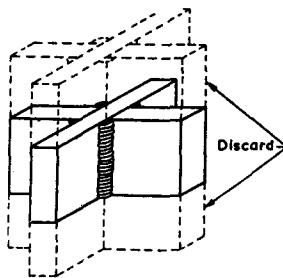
METHOD OF OBTAINING CRUCIFORM TEST SPECIMEN
